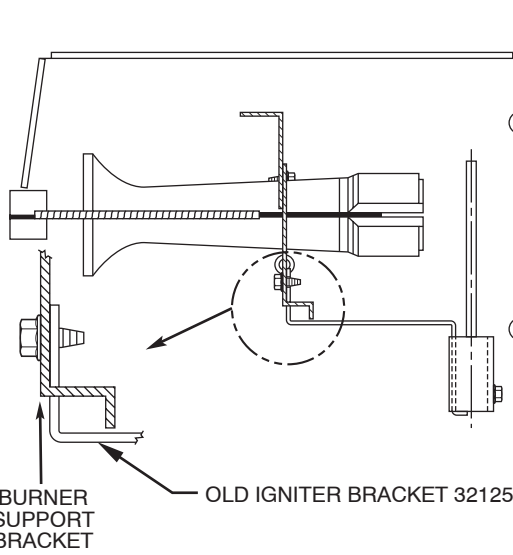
Old Hot Surface Igniter and Mounting Bracket Options
